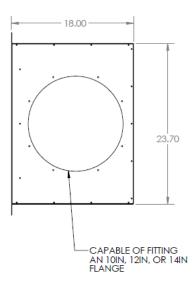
M66/M68 SIZE SOURCE CAPTURE PLENUM DIMENSIONS
